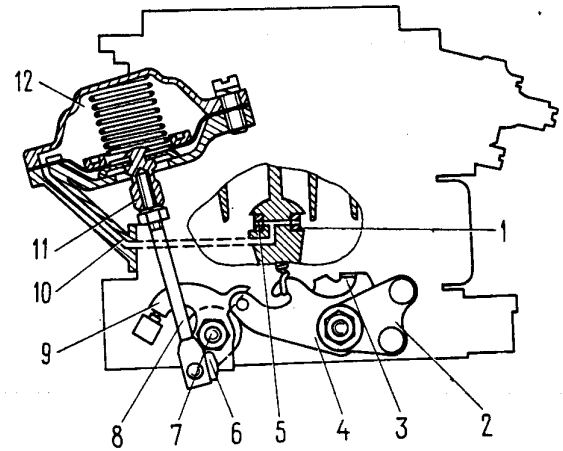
Secondary Throttle Valve Operating Mechanism of Carburetors 2107-1107010-10 and 2107-1107010-20:
